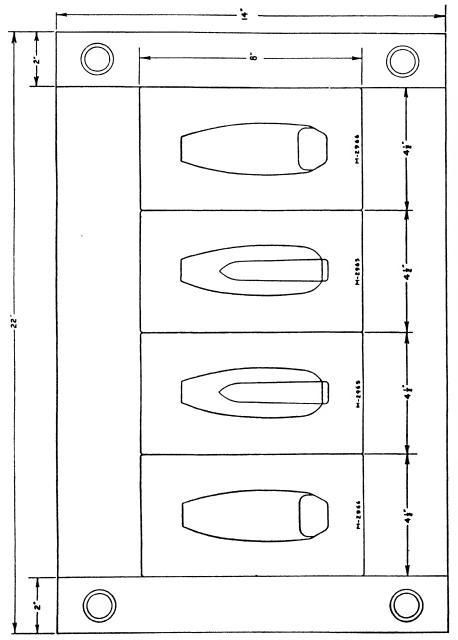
Yoke or mounting plate for four-cavity top and bottom halves of clipper housing.
